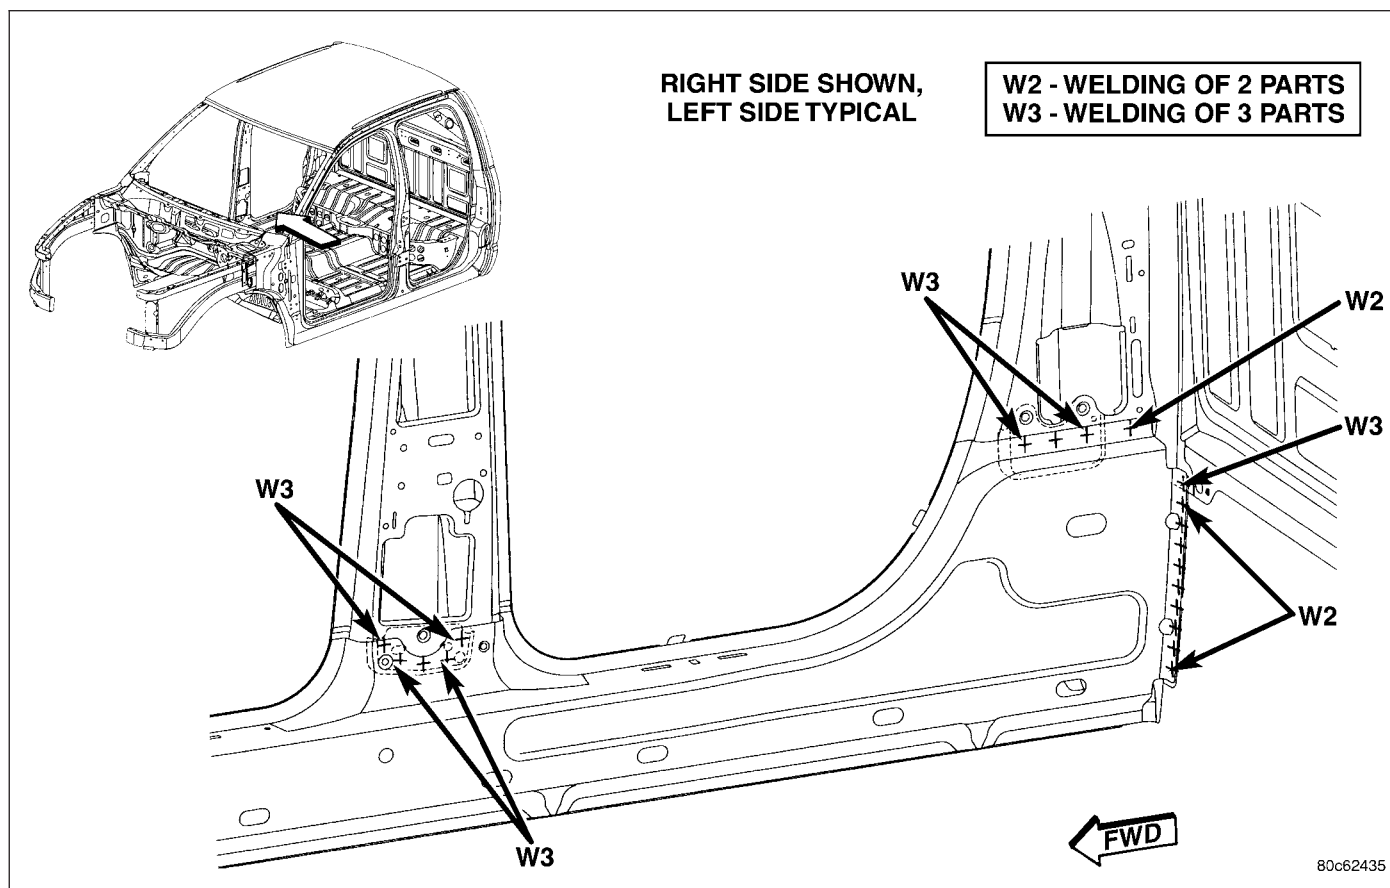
OUTER BODY SIDE APERTURE - QUAD CAB
